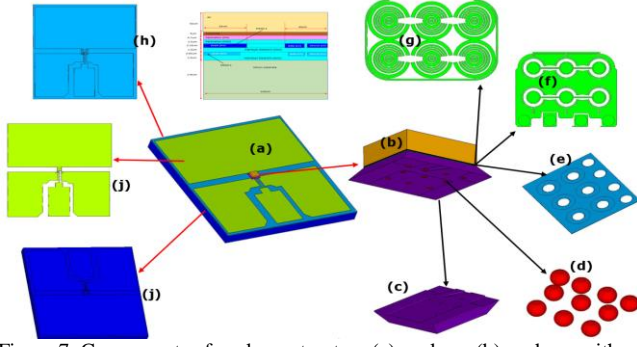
Components of package structure (a) package (b) package without PCB, (c) underfill layer, (d) solder bump, (e) polyimide layer, (f) & (g) aluminium metal layers (h) IMS PCB dielectric layer, and (i) copper layer on the IMS PCB, (j) IMS PCB conductive layer.
